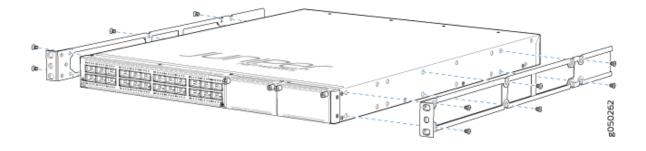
Attaching Mounting Rails to the QFX5100-48S
